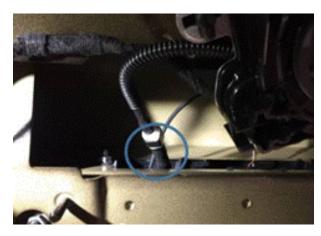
Check valve assembly installed on the e-tron Sportback model.
